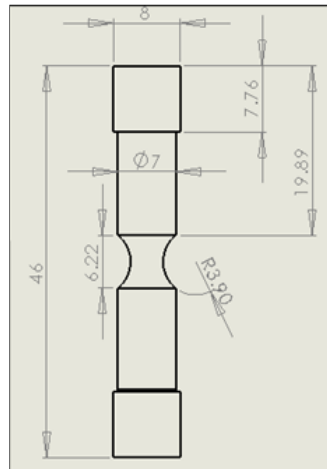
A schematic showing the dimensions of the shallow notched bar samples that were machined from 8mm diameter cylinders.
